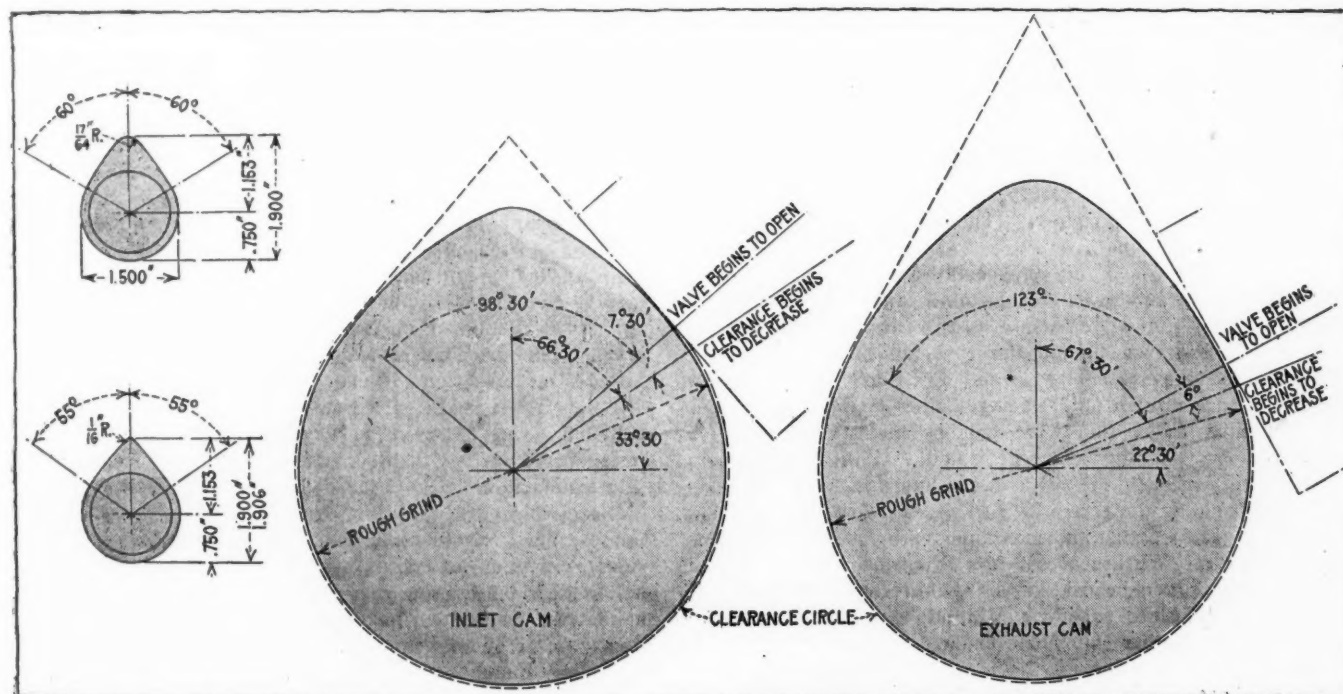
Left, curved exhaust and inlet cams. Right, enlarged view of cams, showing clearance circles
